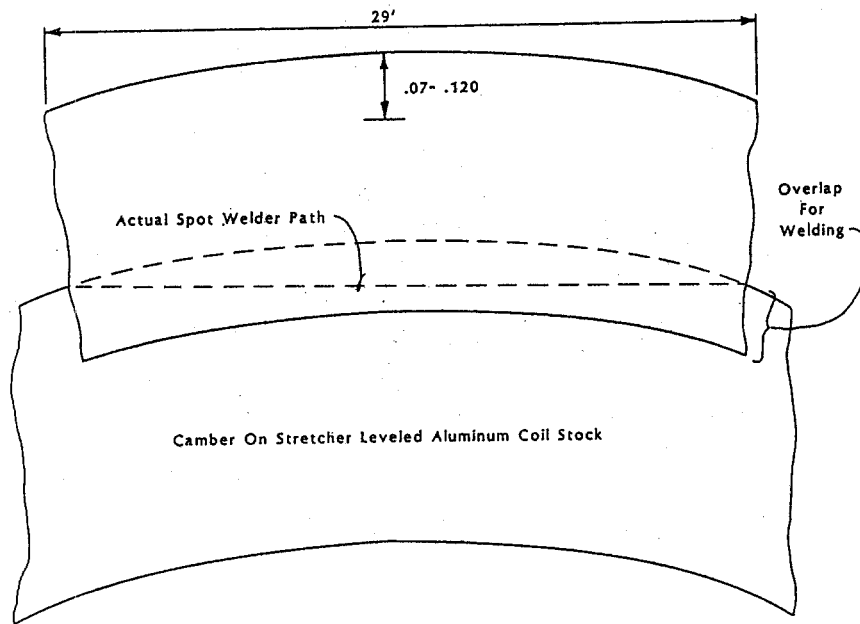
Effects of Coil Stock Camber on Membrane Fabricating.
